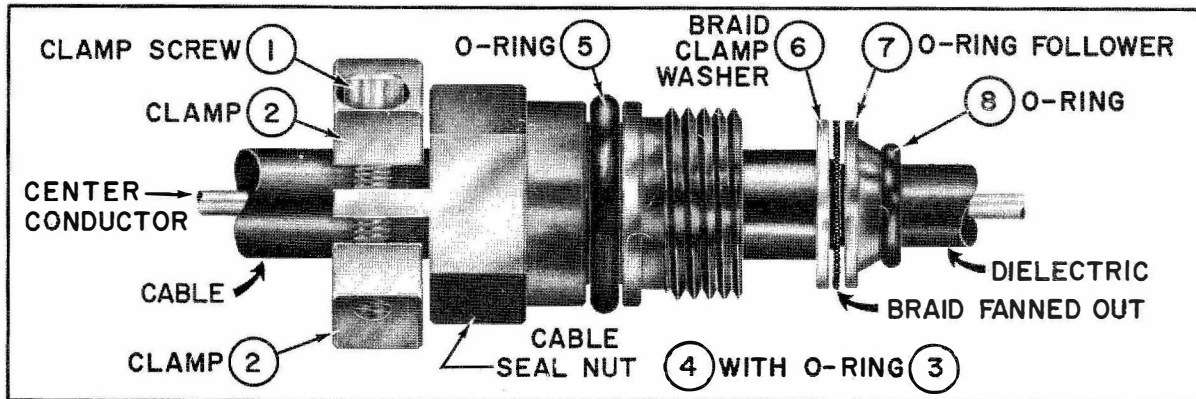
MX-2326/U Partial Assembly, Outboard
